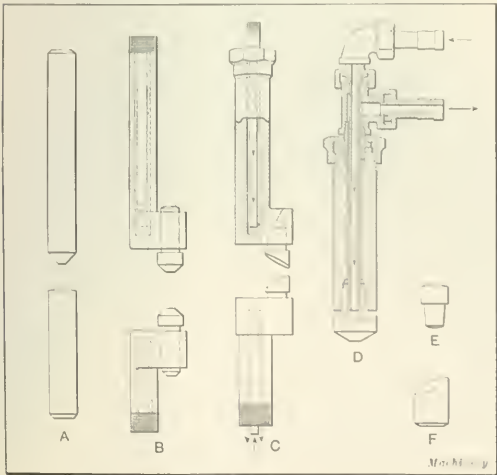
Method of holding and cooling Electrode Points on Electric Spot-welding Machines
